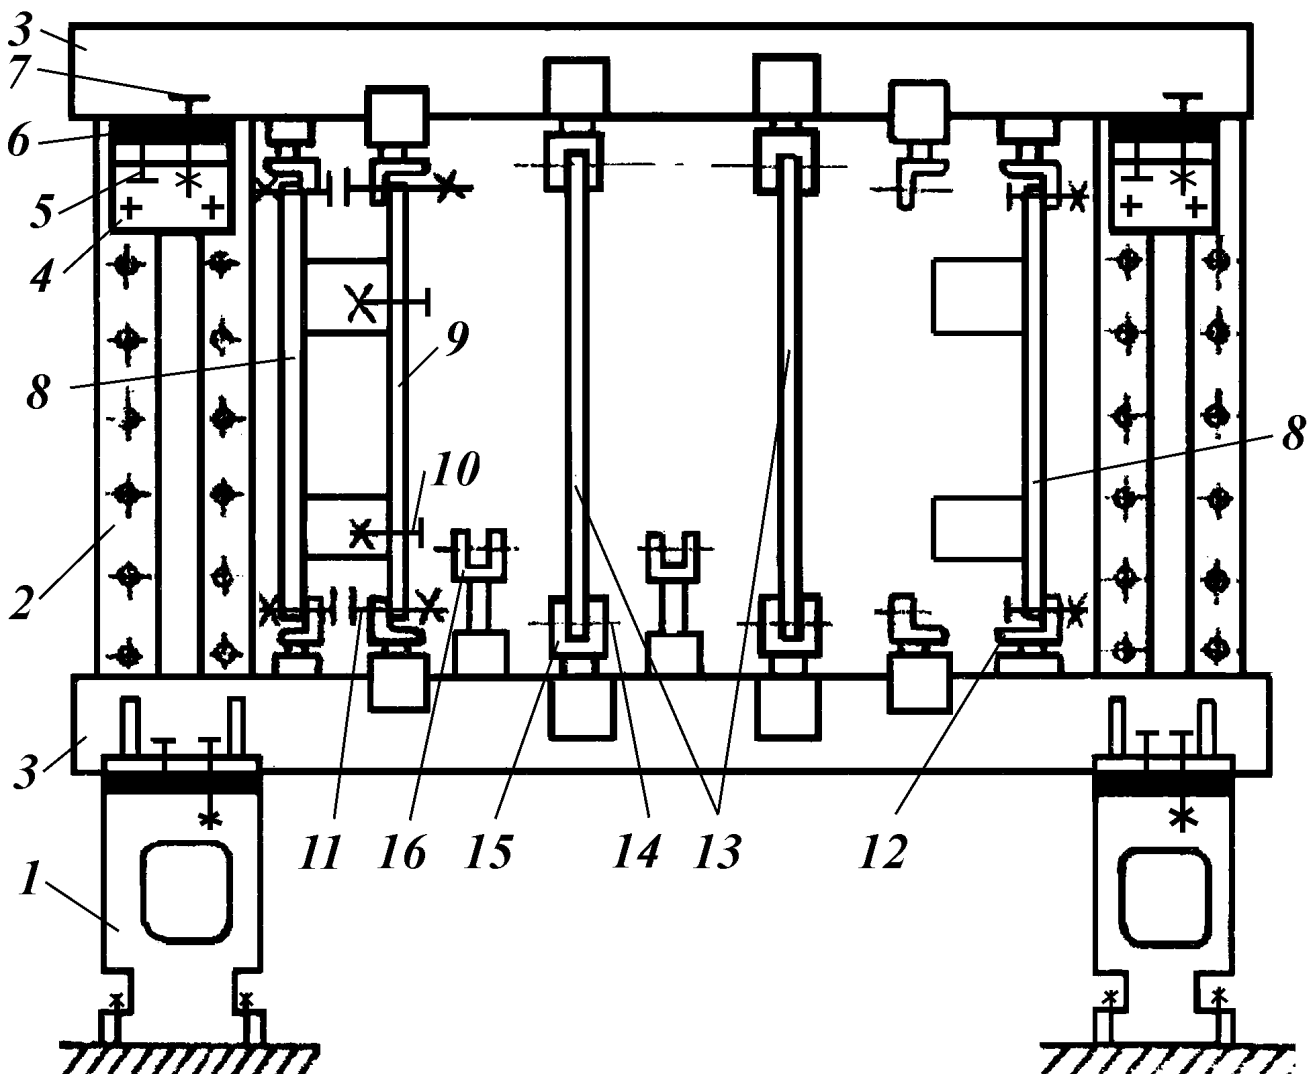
Main elements of the assembly jig (during its mounting procedure):
